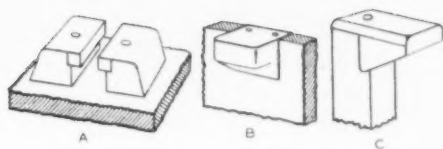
Tin form shapes: (A) T-slot; (B) bolt hole lug; (C) Turned-in end on malleable conveyor chain.
